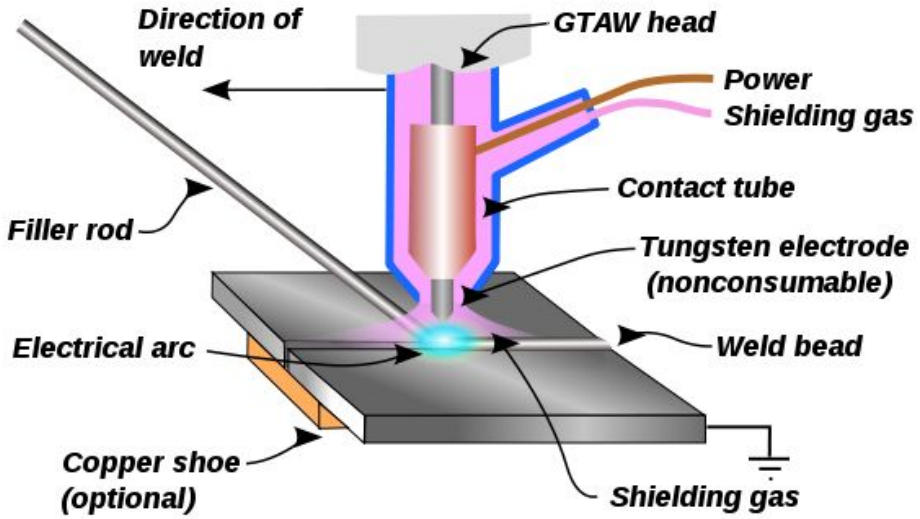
6. Schematic of gas tungsten arc weld.
